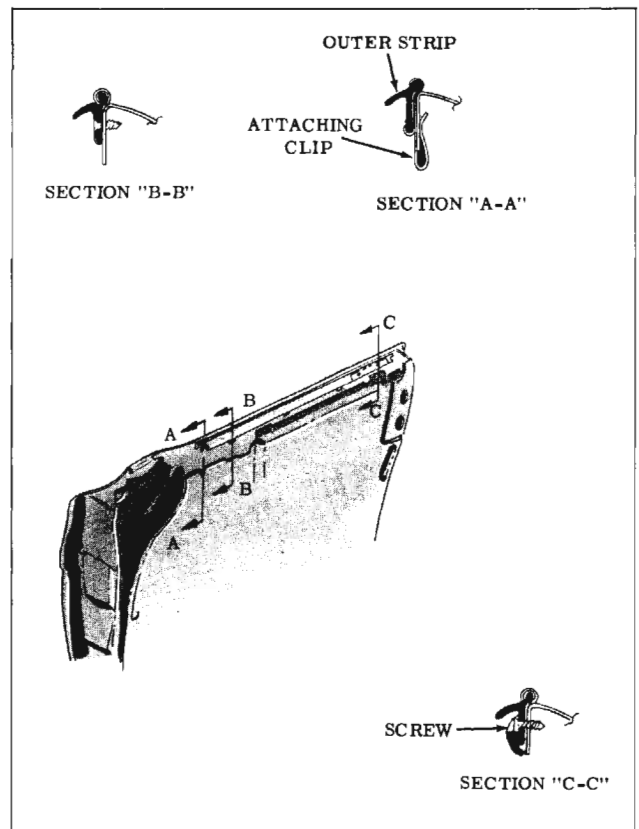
Run Channel Outer Strip without a Belt Reveal Molding
